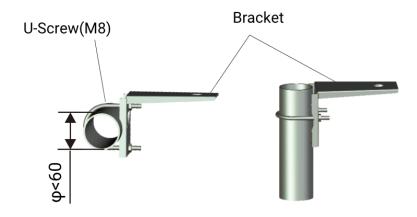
Mounting Bracket Can Be Fixed to Round Tube (Left) or Wall Mounted (Right)
